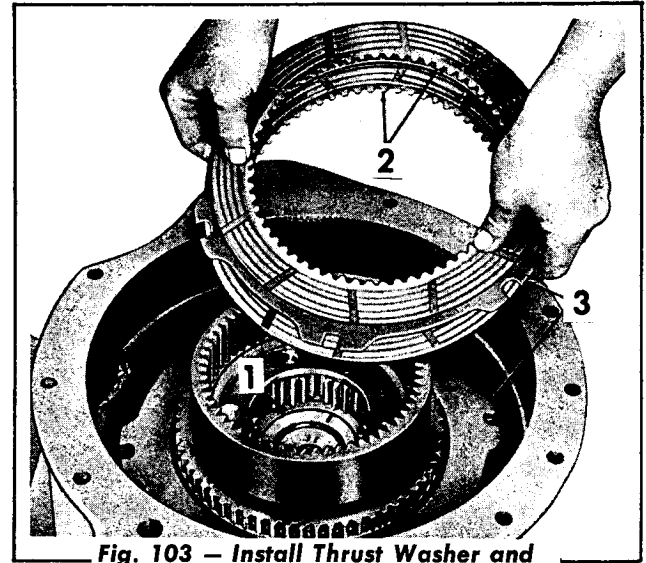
Install Thrust Washer and Forward Clutch Plates
